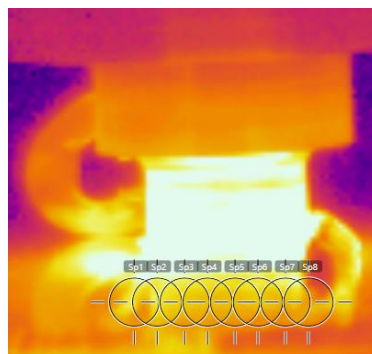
Initial Probe Positions for Thermal Mapping of the Weld
